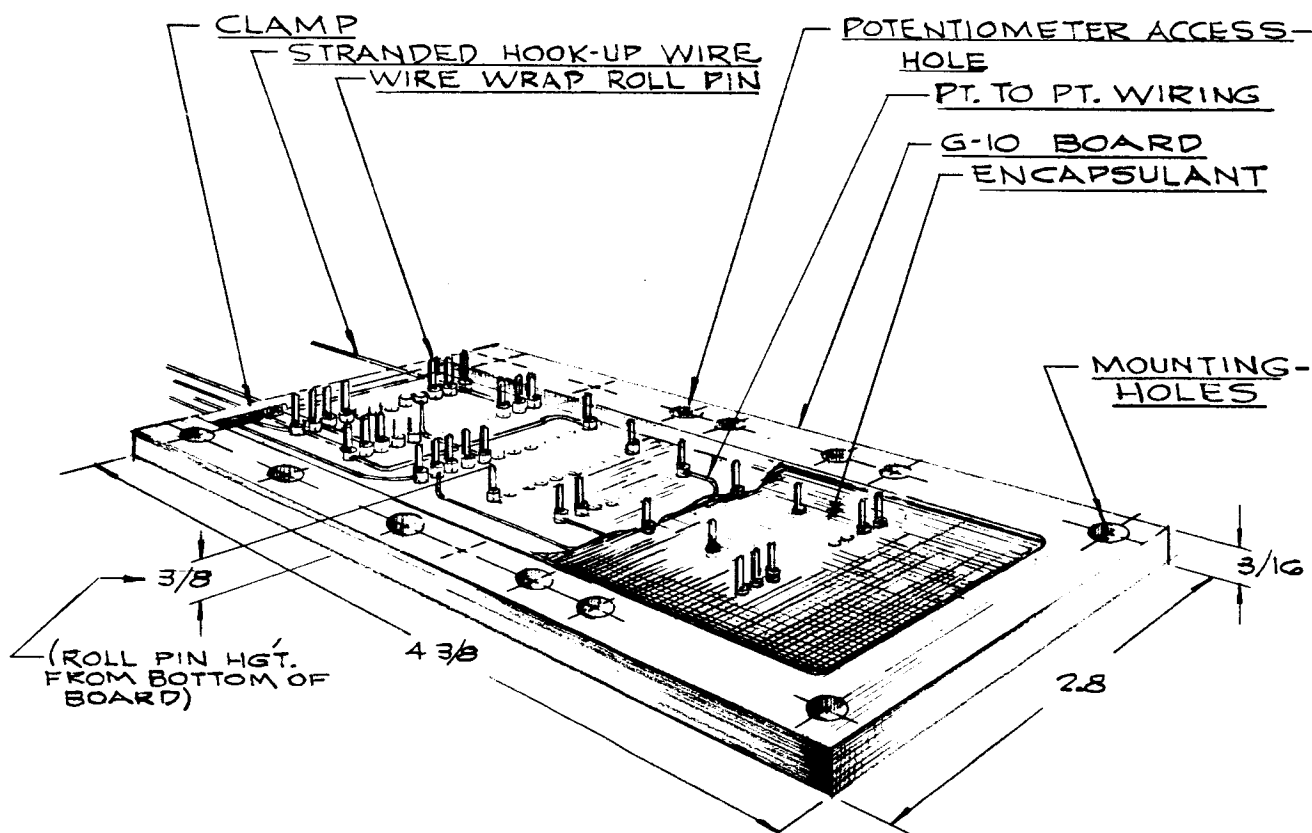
Wiring Subassembly (Encapsulant Partially Removed)
